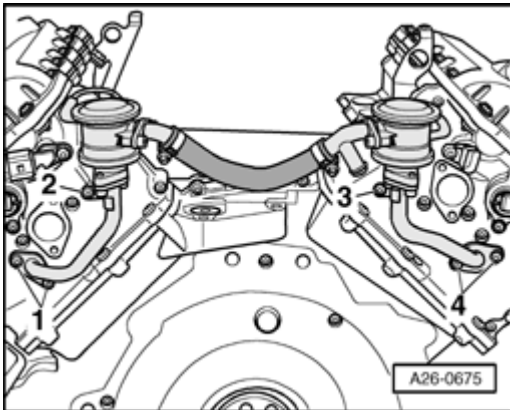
Removing Secondary Air Injection (AIR) System Combi-Valve Mounting Bolts
